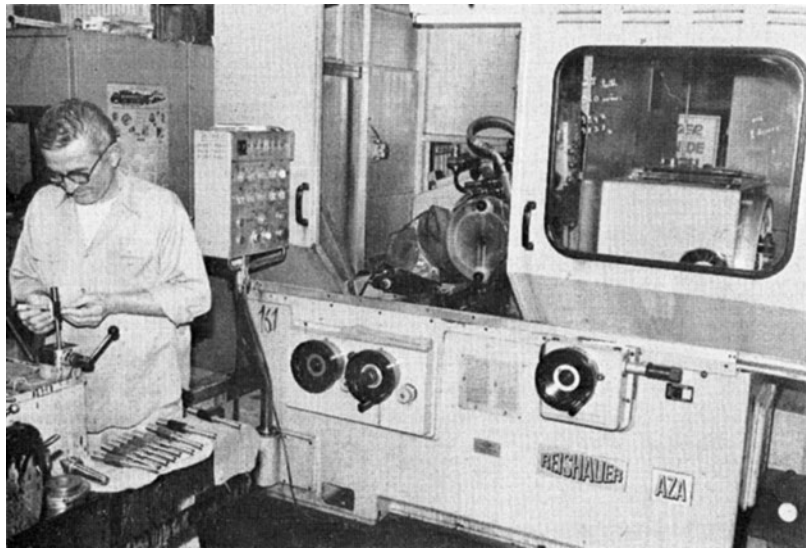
Grinding helical pinions on a threaded grinding wheel machine. (Courtesy of Sier-Bath Gear Co., North Bergen, New Jersey.)
